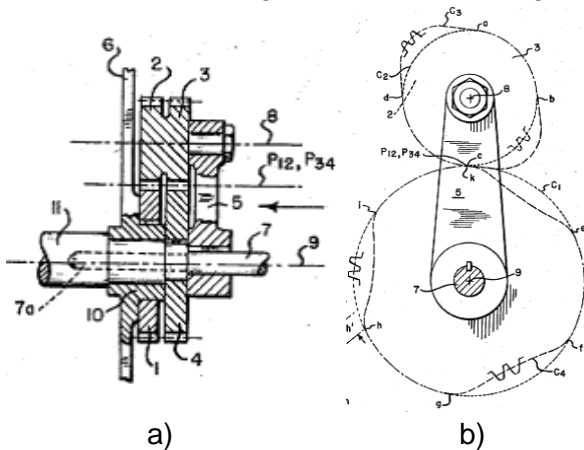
Meshing on circular sector, section (a) and lateral view (b) [65]
